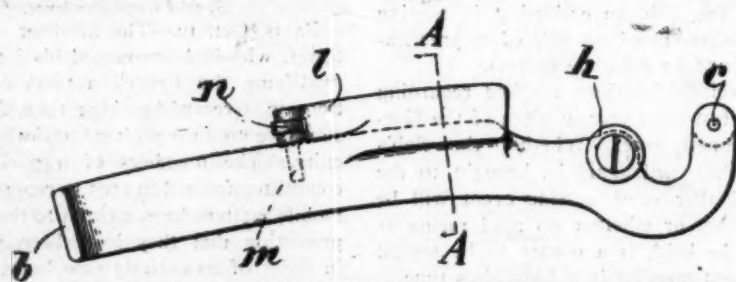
SIDE VIEW OF TIRE TOOL, SHOWING HOOKED END, WITH ROLLERS.
